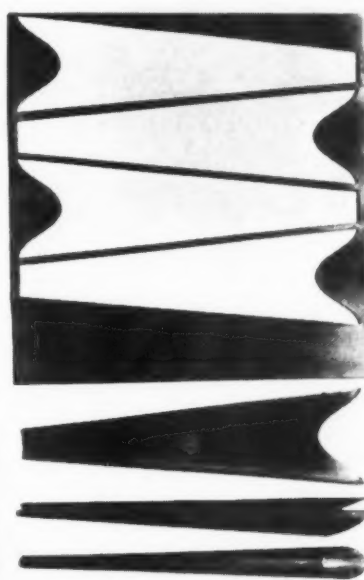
Scrap Stock, Blank, U-formed Blank, and Finish-formed Tapered Spout
